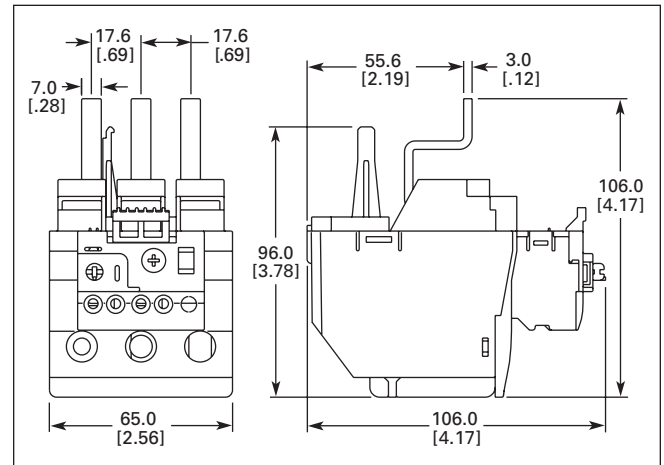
65 mm C396 (15 – 75A) Direct Connect to XT Frame D Contactor — Approximate Dimensions in mm [in]
